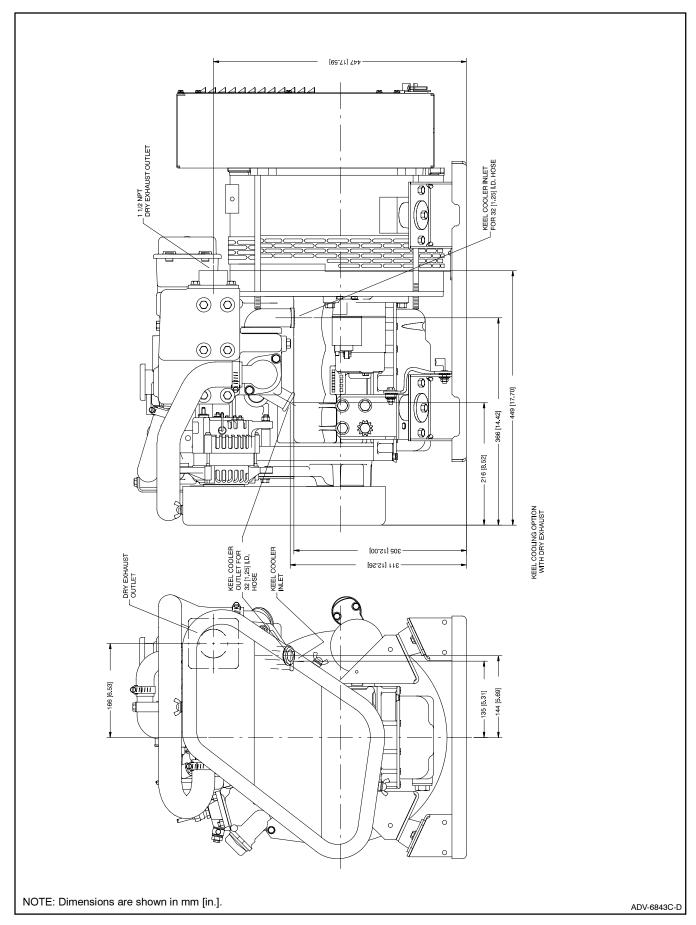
Dimension Drawing, 8EOZD and 6.5EFOZD with Keel Cooling
